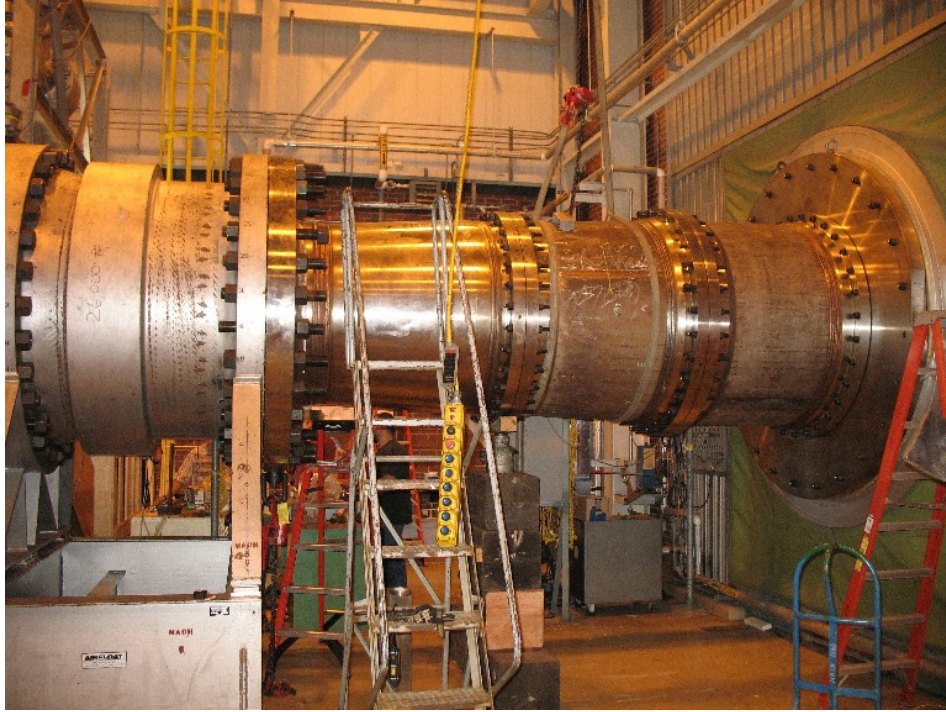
Assembly of M5HiQ Nozzle Extension Pieces
